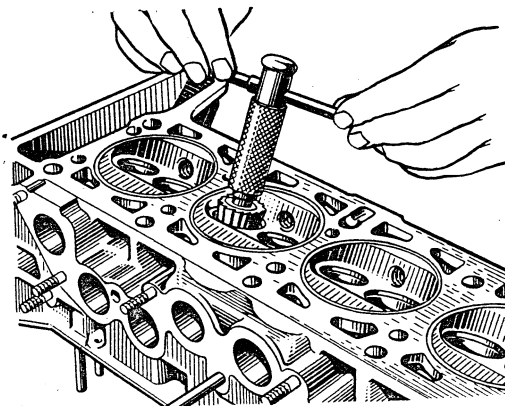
Chamfering the Valve Seat Face with Counterbore Installed on Spindle A.94058
